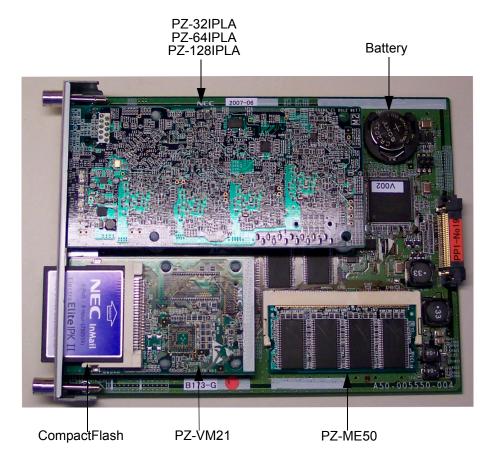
CD-CP00-US Blade with Daughter Boards Installed
